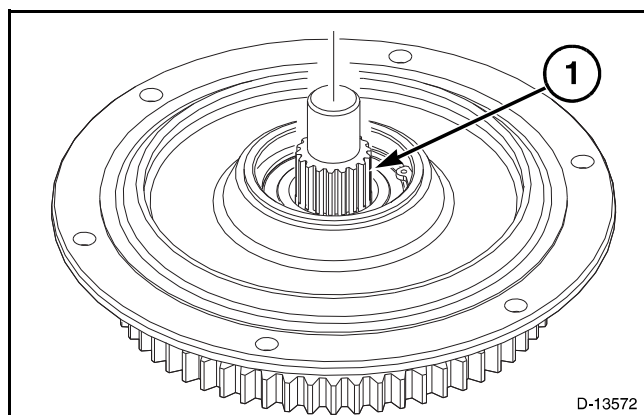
Position the face of the spindle gear on the bed of a press with the spindle facing up.
